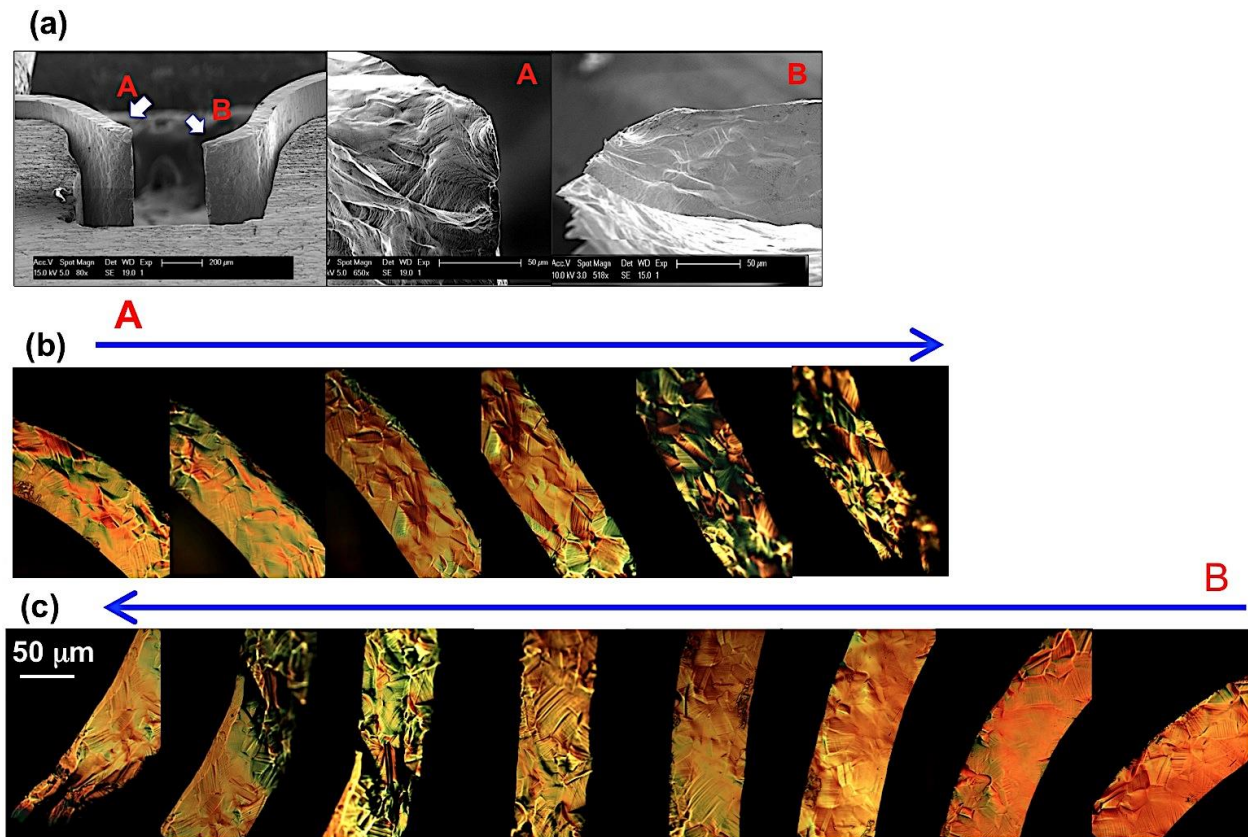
a) SEM images of fractured 100 μm as-received Ni sheet. A and B refer to left and right sides of fractured sample. b) and c) Optical images of the surface of fractured sample; arrows show direction of taking images in sides A and B. Images show a very inhomogeneous roughness on the surface after deformation.
